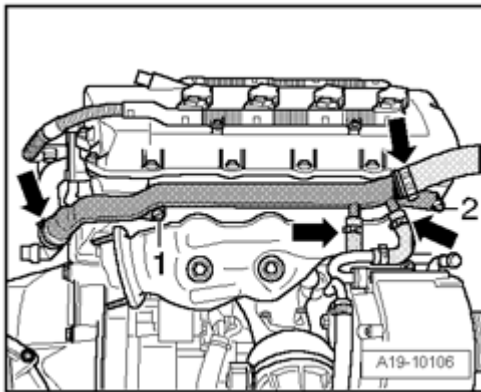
Removing Bolts & Loosening Hose Clamps And Removing Right Coolant Pipe From Coolant Hoses
